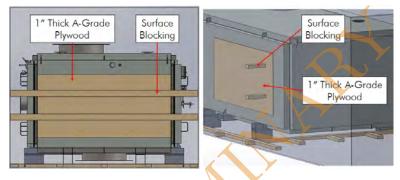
Surface blocking technique on two different surfaces of the ecoCUBE®
